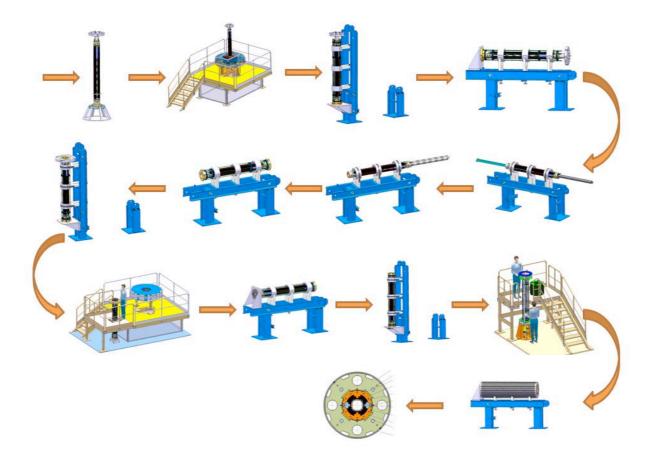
Assembly sequence of the MQXC quadrupole magnet
